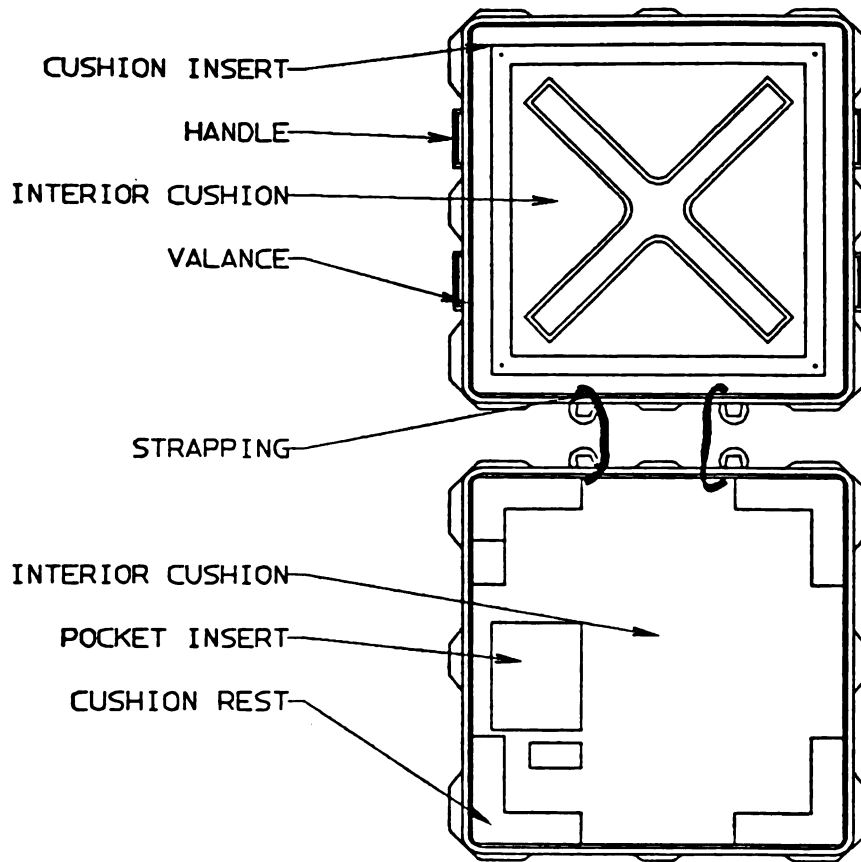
Top View of the Packaging System for the I.B.M. Circuit Board.
